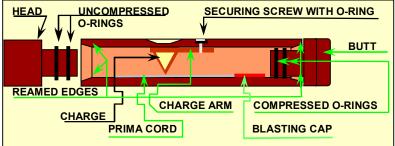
An illustration of scallop gun stock with head, butt, their o-rings, some prima cord, a blasting cap and a mounted charge with its securing screw and o-ring.
